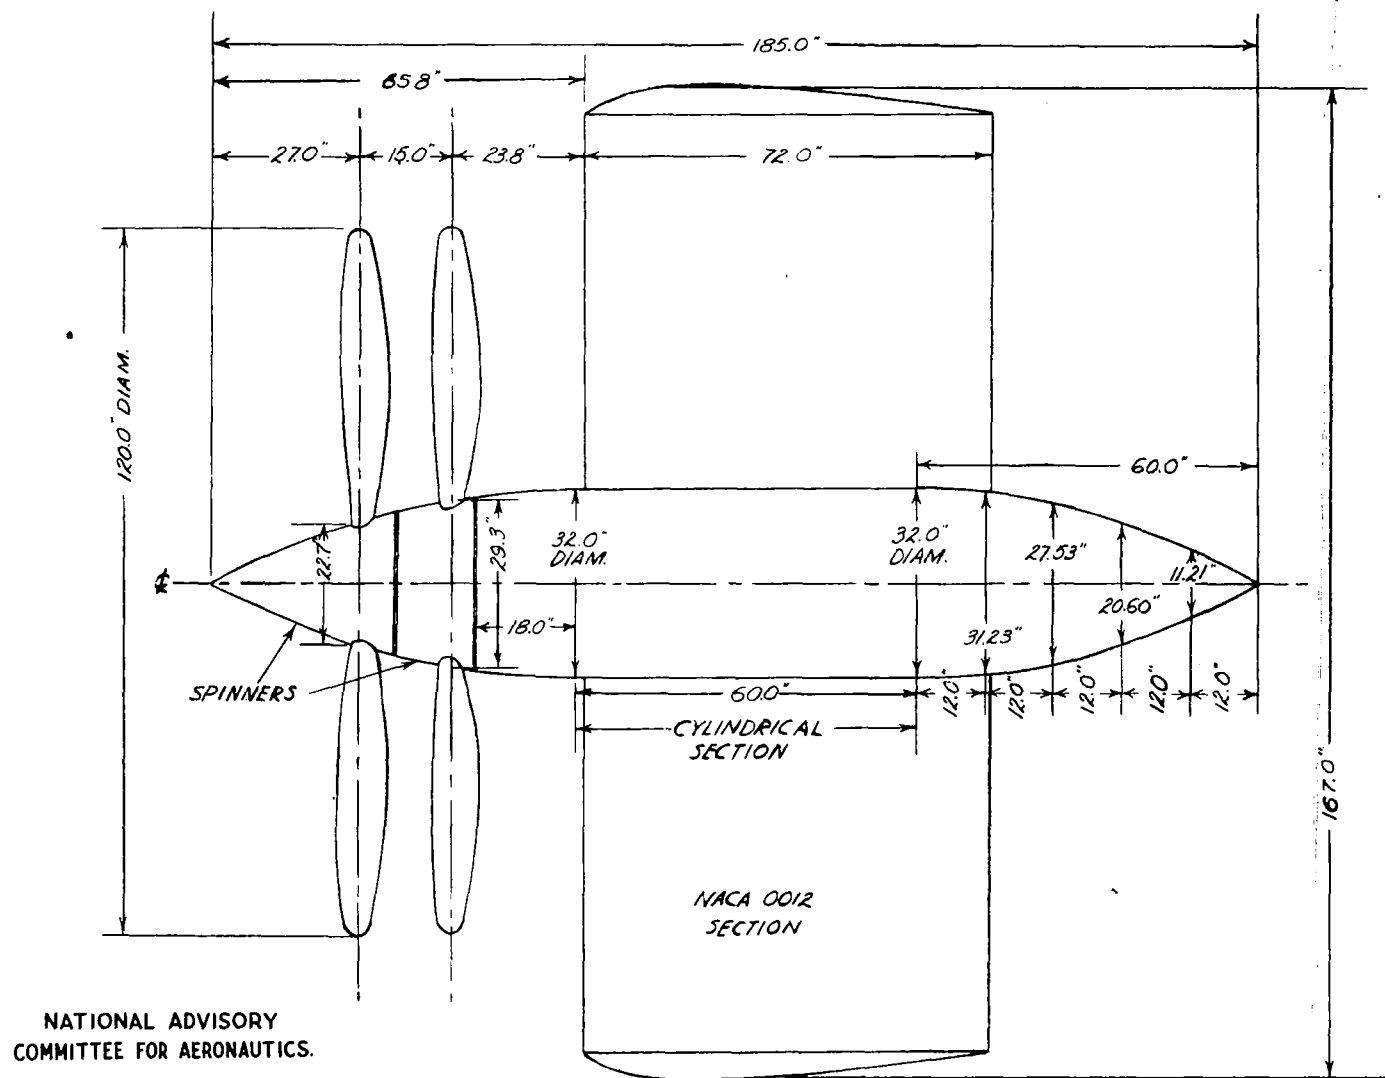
Plan view showing dimensional details of wing and nacelle.
